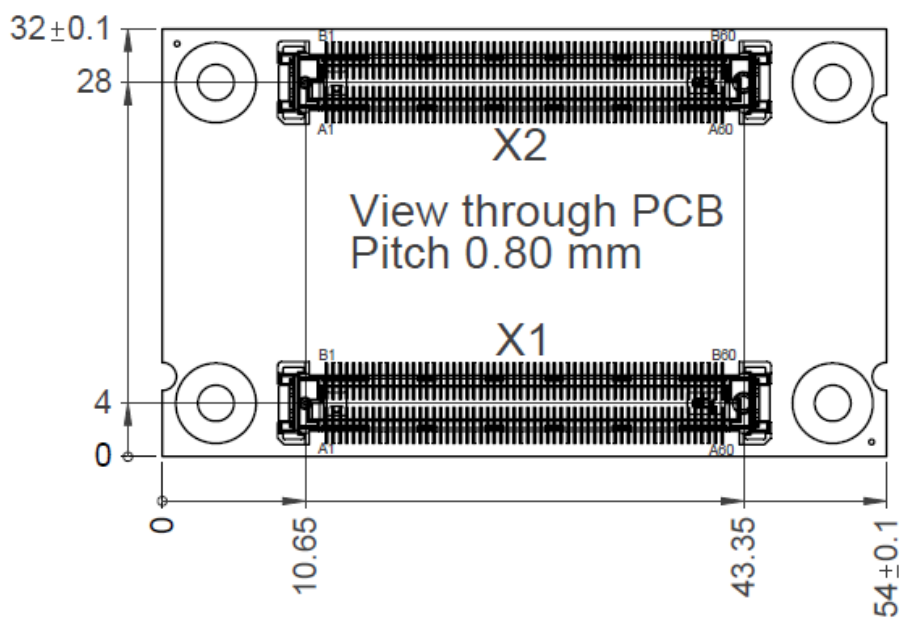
TQMa93xxCA dimensions (in mm), view through PCB
